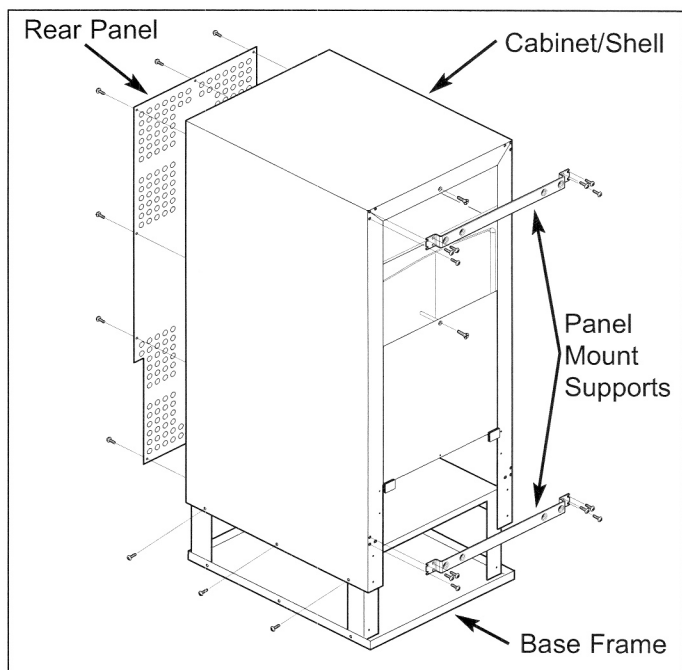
Hinge Mount Support Bracket, Rear Panel & Cabinet/Shell Removal
